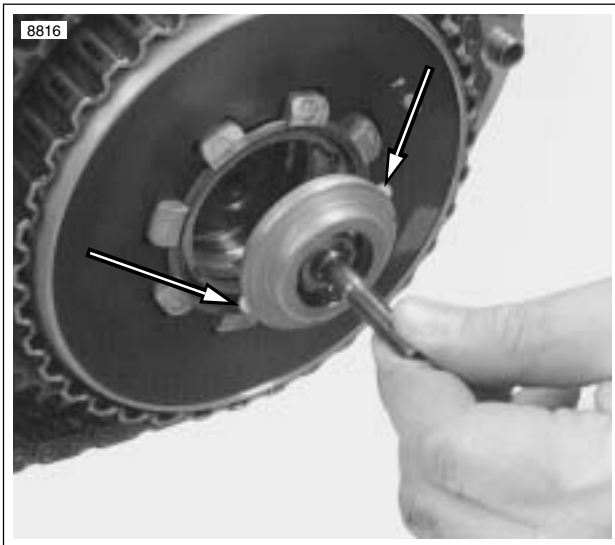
Adjusting Screw Assembly Aligning Tabs
